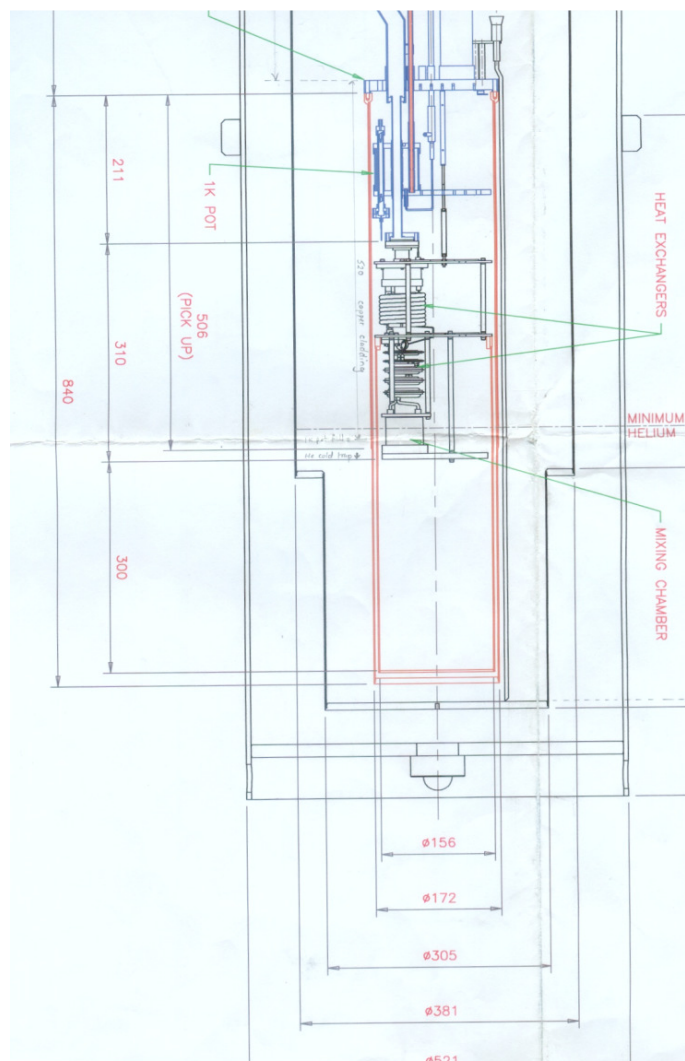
Technical drawing of the Oxford Instruments dilution refrigerator.
